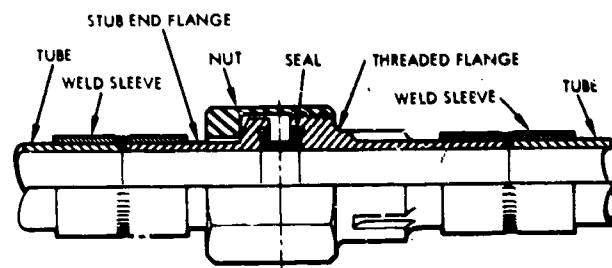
AFRPL Connector, Showing Tube-to-Tube Connection
